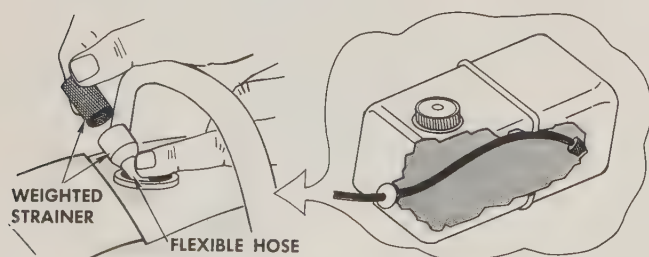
Types of fuel strainer attached to flexible hose inside the fuel tank. (Left) Flexible hose partly pulled from fuel tank so strainer can be removed for cleaning. (Right) Tank partly cut away so hose and strainer can be seen in tank.
